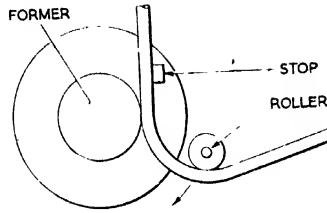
A BENDING MACHINE BEING USED TO OPEN A BEND WHICH HAS BEEN BENT TOO FAR
